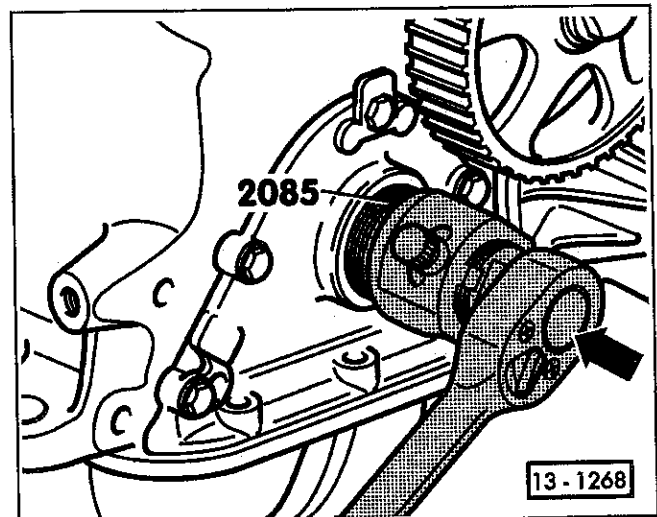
Crankshaft front oil seal being removed using Volkswagen special tool no. 2085. Rotate tool clockwise to remove seal.
